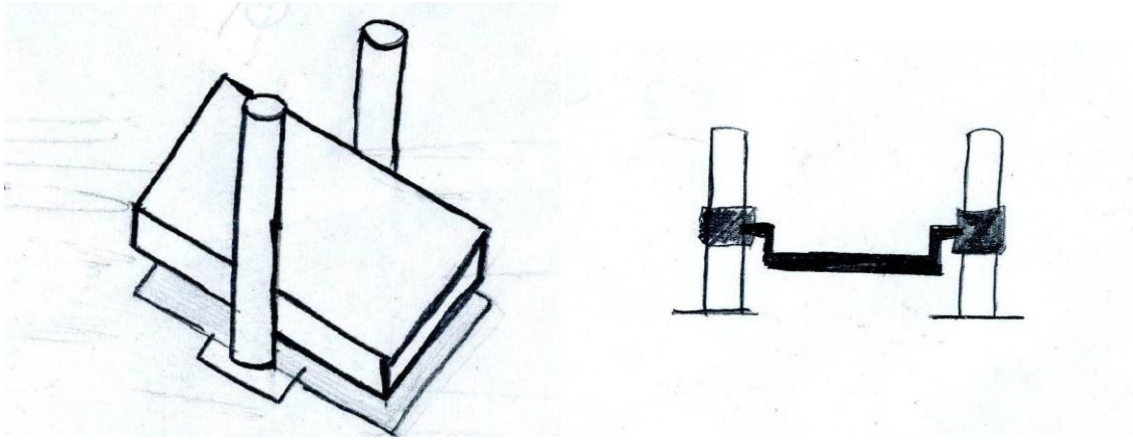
Concept drawing of Parallel Piston lift mechanism
